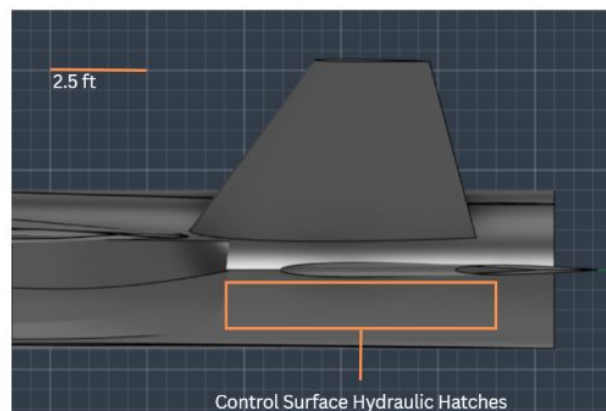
YFQ-75 Trident Side View - Control Surface Hydraulic Hatches
